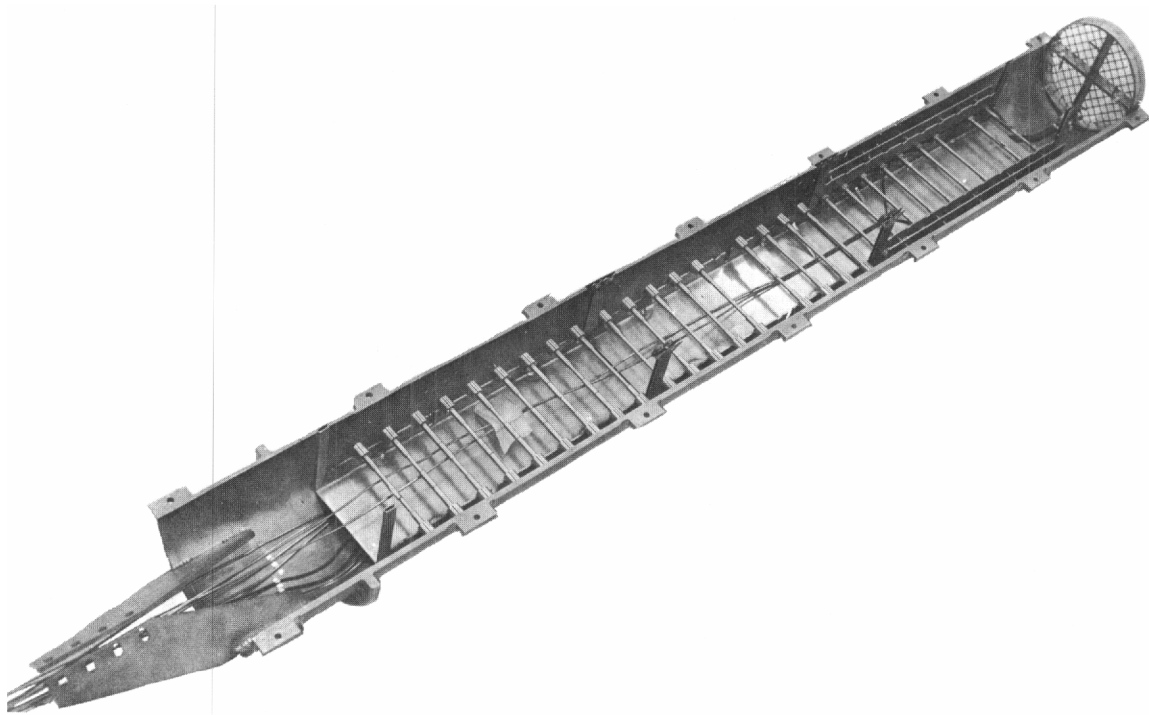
Capsule MT-27 during initial assembly (Neg. U39200-E)
